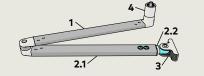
J12 – Splined push arm assembly, 500 mm, 8" - 12" reveal
